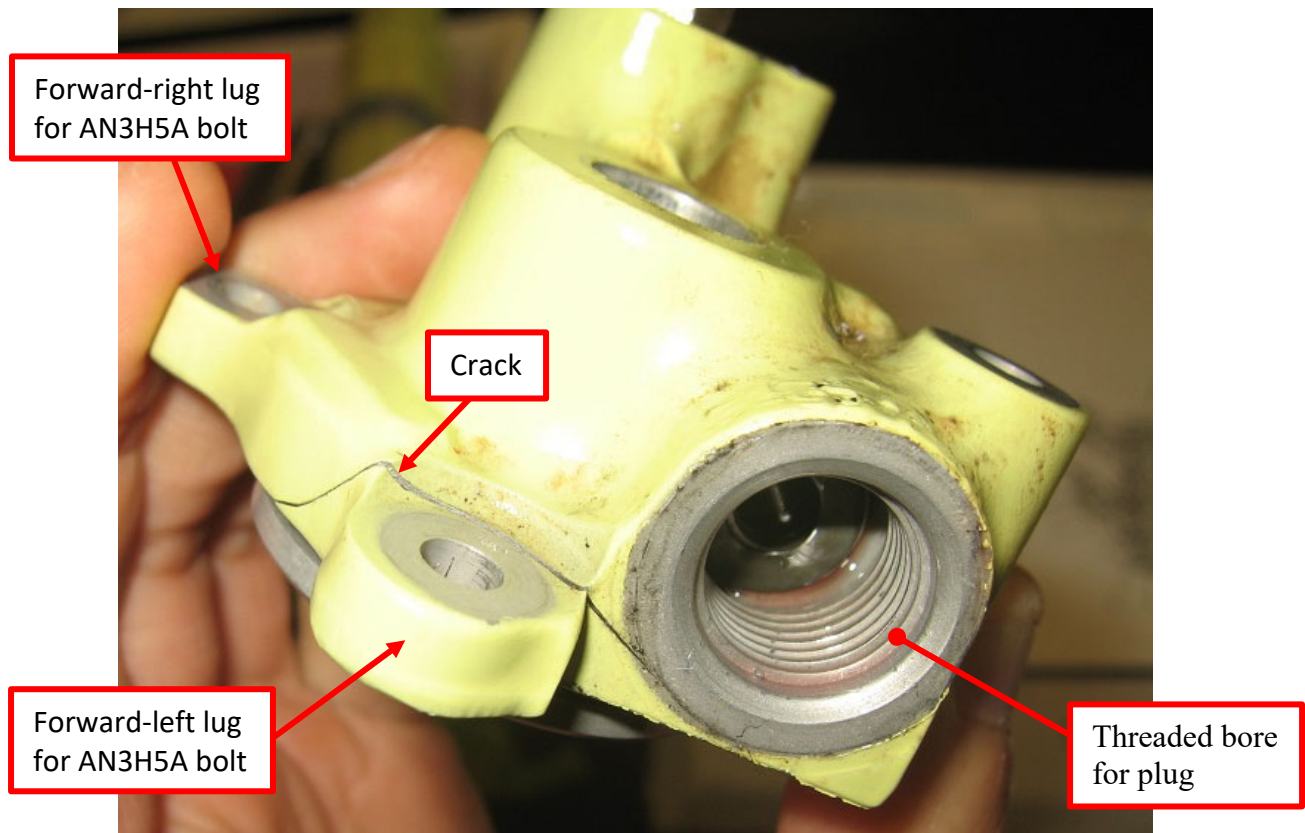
A view of the pedal damper check valve housing showing the extent of crack growth on the AN3H5A bolt hole lug. (Image courtesy of Sikorsky)
